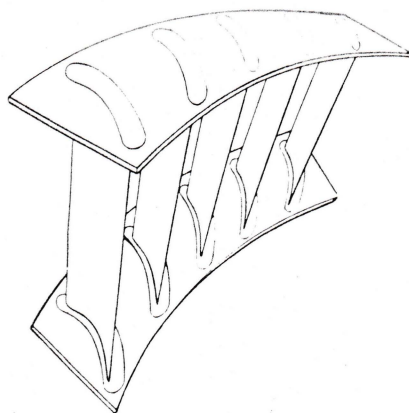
BRAZED TURBINE NOZZLE SEGMENT.
